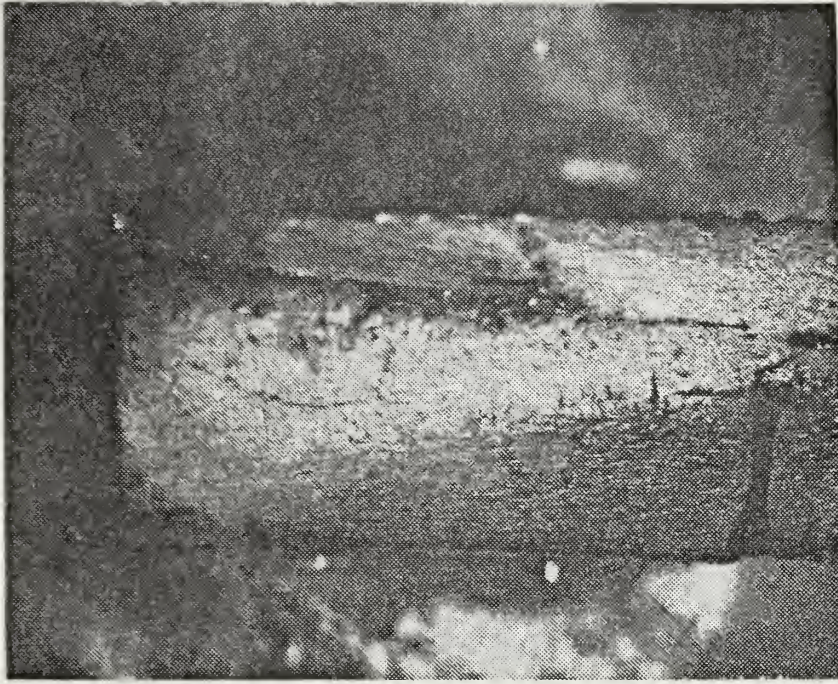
Fatigue fracture surface of specimen AR-4-9, fractured after 7,700,000 cycles at 49 ksi, showing two fatigue zones. X10.
